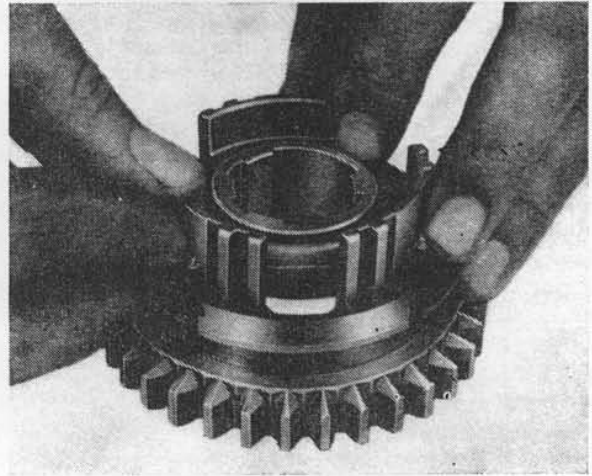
/4 - Assembling 1st- and 2nd-speed Synchronizing Clutch - Installing the Core and Pressing in the Balls
